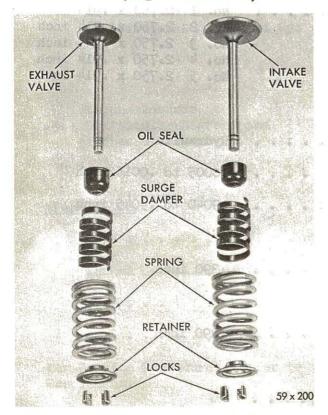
Intake and Exhaust Valves (Disassembled View)
